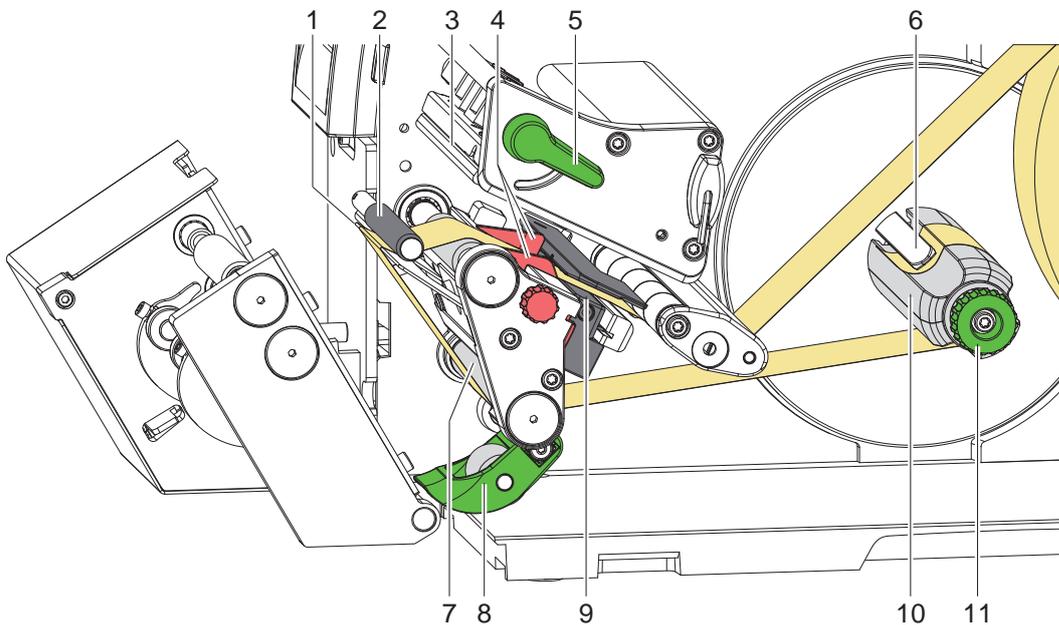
Inserting the media into the printhead and fixing the liner at the rewinder
